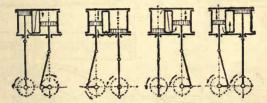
Compound Engine, with cranks at right angles, with receiver.
